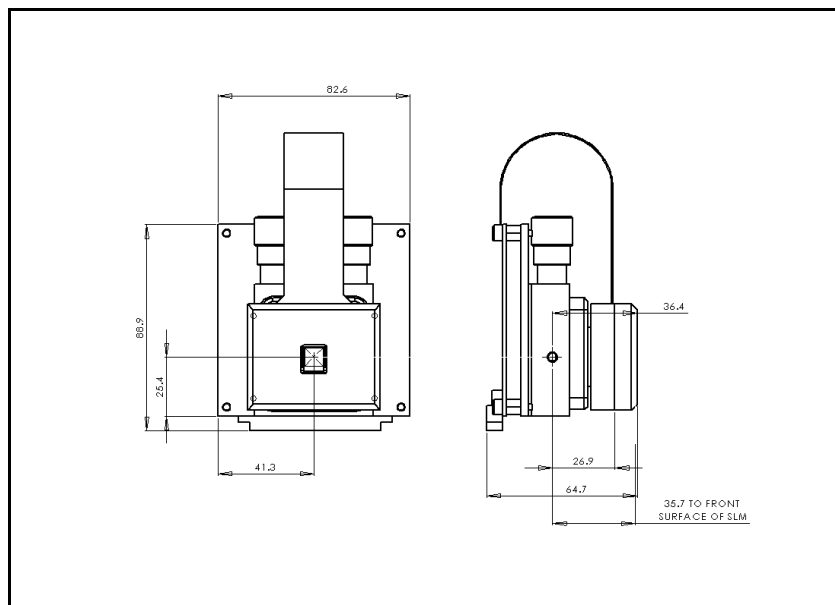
~ Outline drawing showing front and side views of 512 SLM Optical Head.
